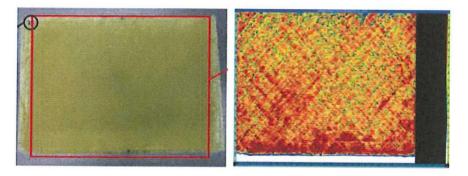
Biaxial polyurethane laminate 25 is inspected on the vacuum bag side. The defects are distributed through the laminate. The upper part shows more defects than the bottom part.
